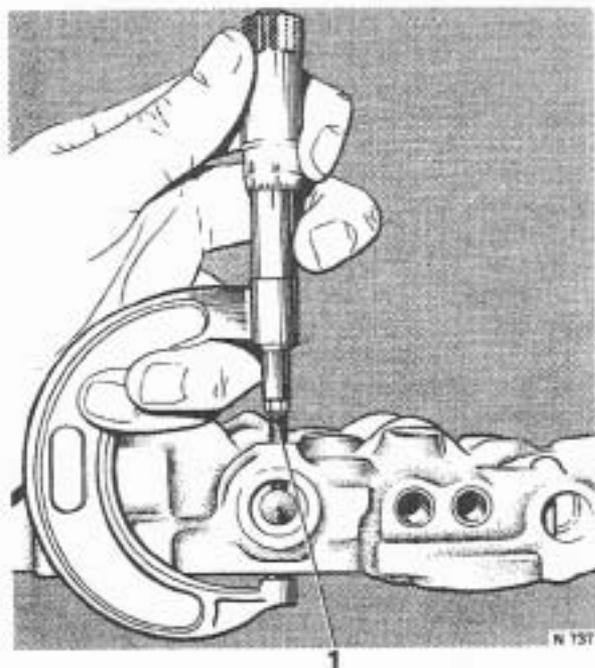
MEASURING THE ADJUSTING SCREW (EARLY CARS)
